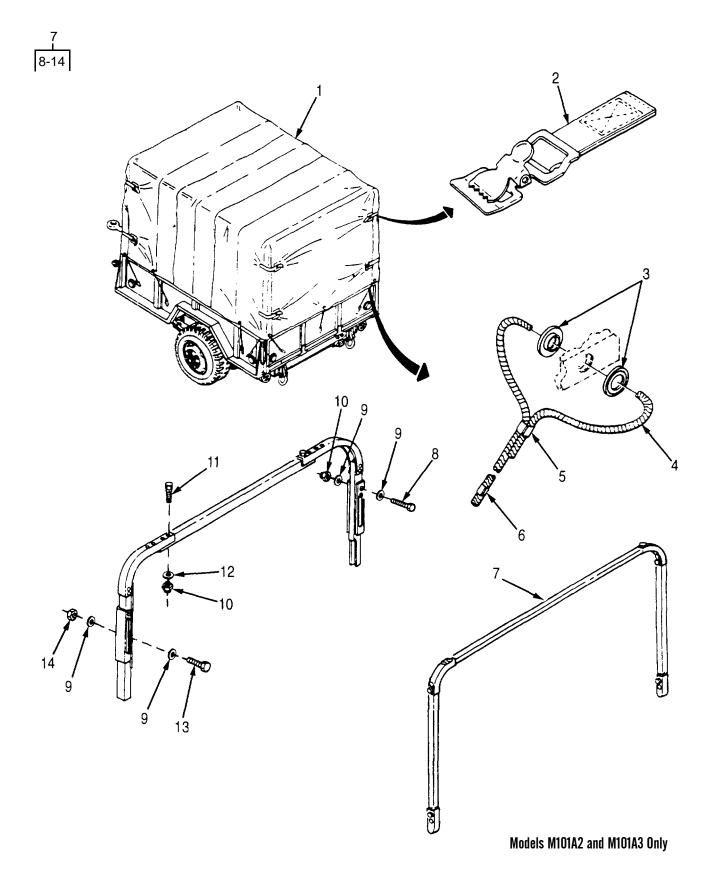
Canvas Cover Assembly and Bows (Sheet 1 of 2)
